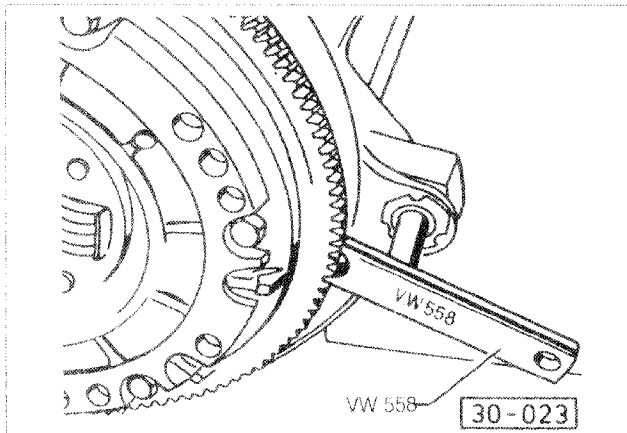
Flywheel secured with holding fixture VW 558.
